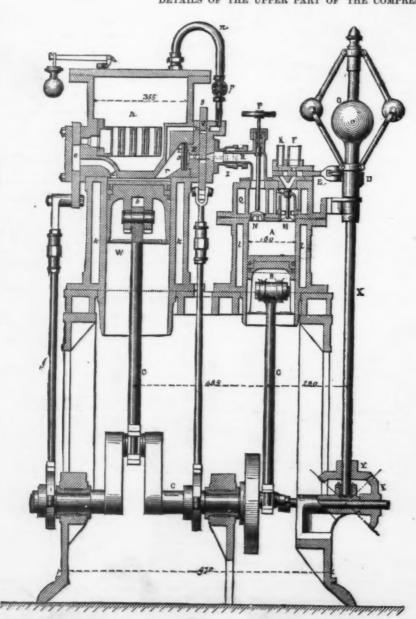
SIMON'S GAS AND STEAM MOTOR (Transverse Section)
